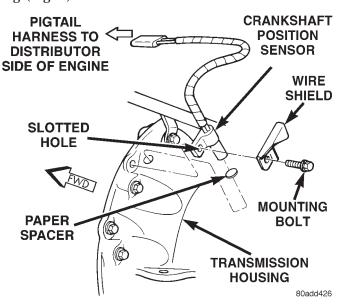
Crankshaft Position Sensor—4.0L Engine
